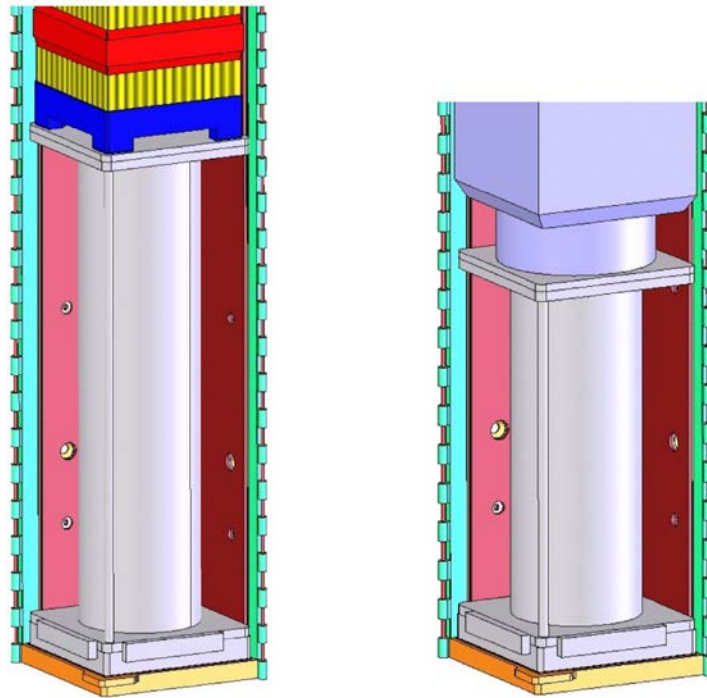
Axial Spacer Assembly (length depends on fuel assembly type)
